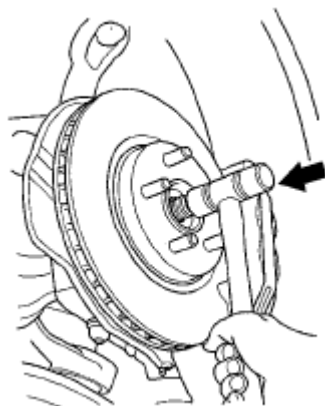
Removing Outboard Joint Using A Plastic Hammer After Pulling Knuckle Outward
